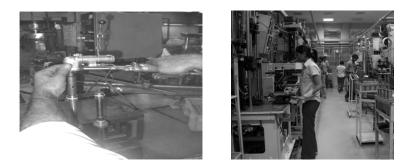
A typical photograph of guide disk assembly event at traditional and semi-ergonomic shocker assembly line
